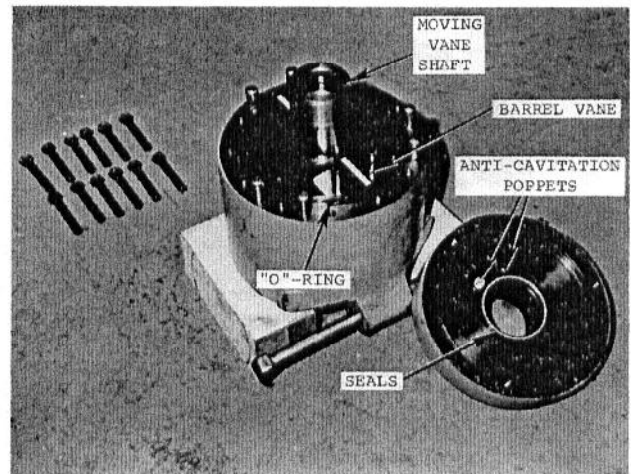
Top Cover Removed Exposing Interior of Cylinder
